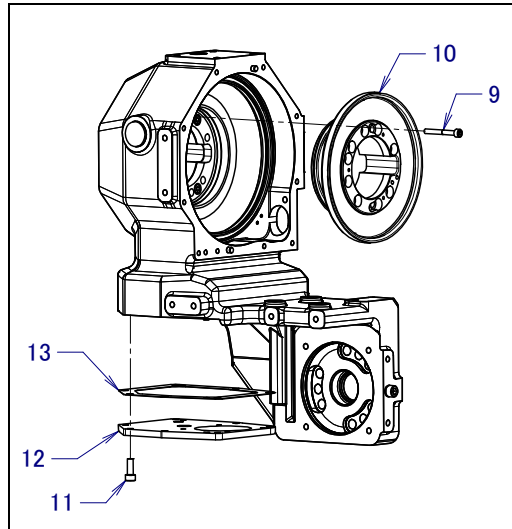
(e) Replacing the J4-axis gearbox unit (4/4)
